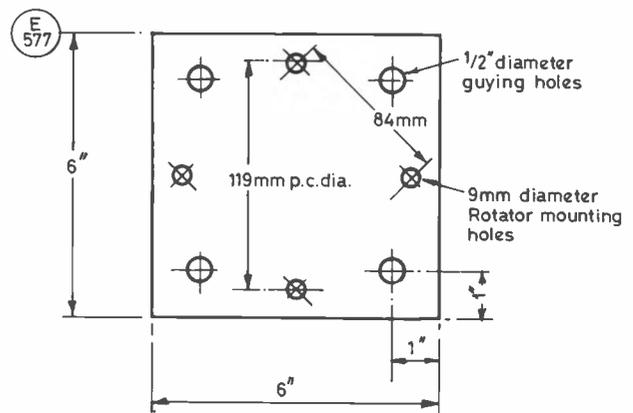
BOTTOM PLATE  $\frac{3}{16}$ " Mild steel plate (see text)
